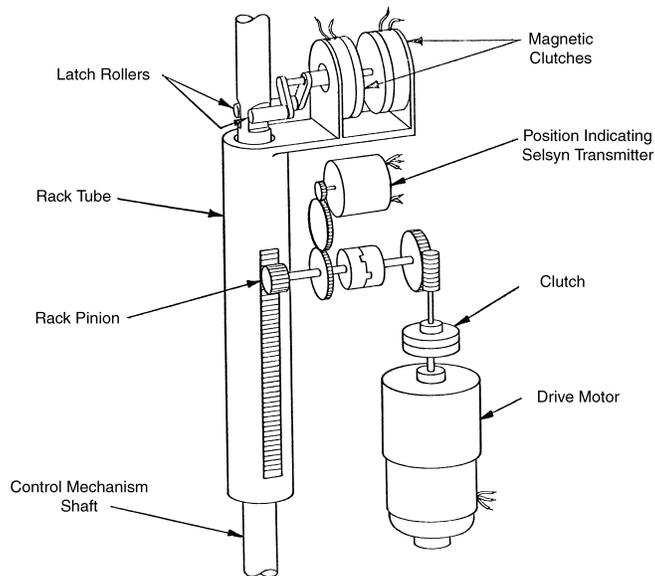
CONTROL DRIVE AND LATCH MECHANISM.
